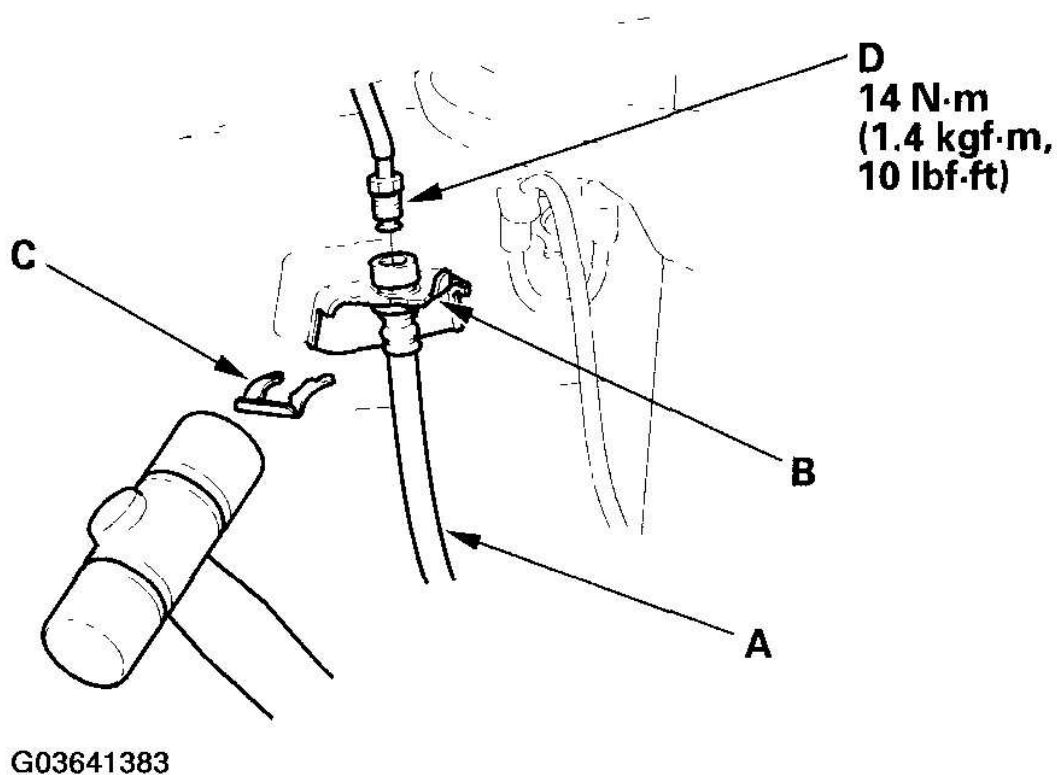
Installing Brake Hose On Upper Brake Hose Bracket
